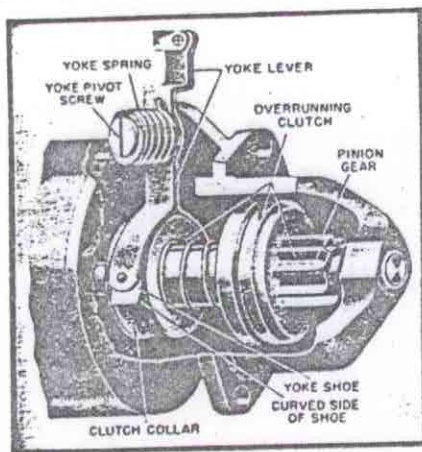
Assembly of overrunning clutch and yoke shifting lever. Make sure curved sides of yoke shoes are toward gear end of clutch. Reversed yoke shoes can cause improper meshing of pinion
